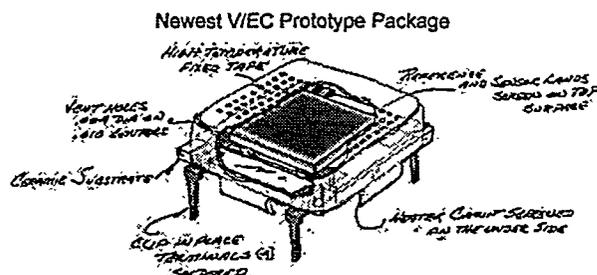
V/EC microsensor package design (stamped metal enclosure).
